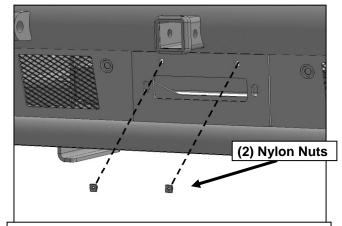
Attach the light with Bracket to mounting tabs on the Bumper (arrow)
